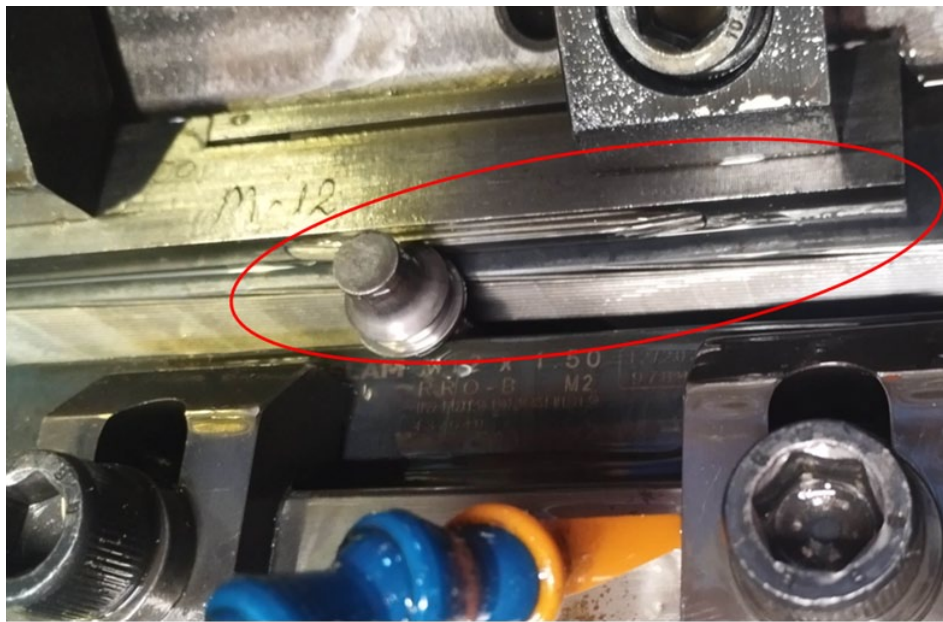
Thread rolling with simultaneous calibration of the bolt head radius using an additional rolling jaw
